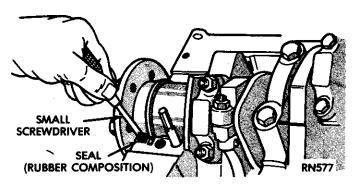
Removing Composition (Rubber Type) Seal CAUTION: Always wipe crankshaft surface clean, then oil lightly before installing a new seal.
